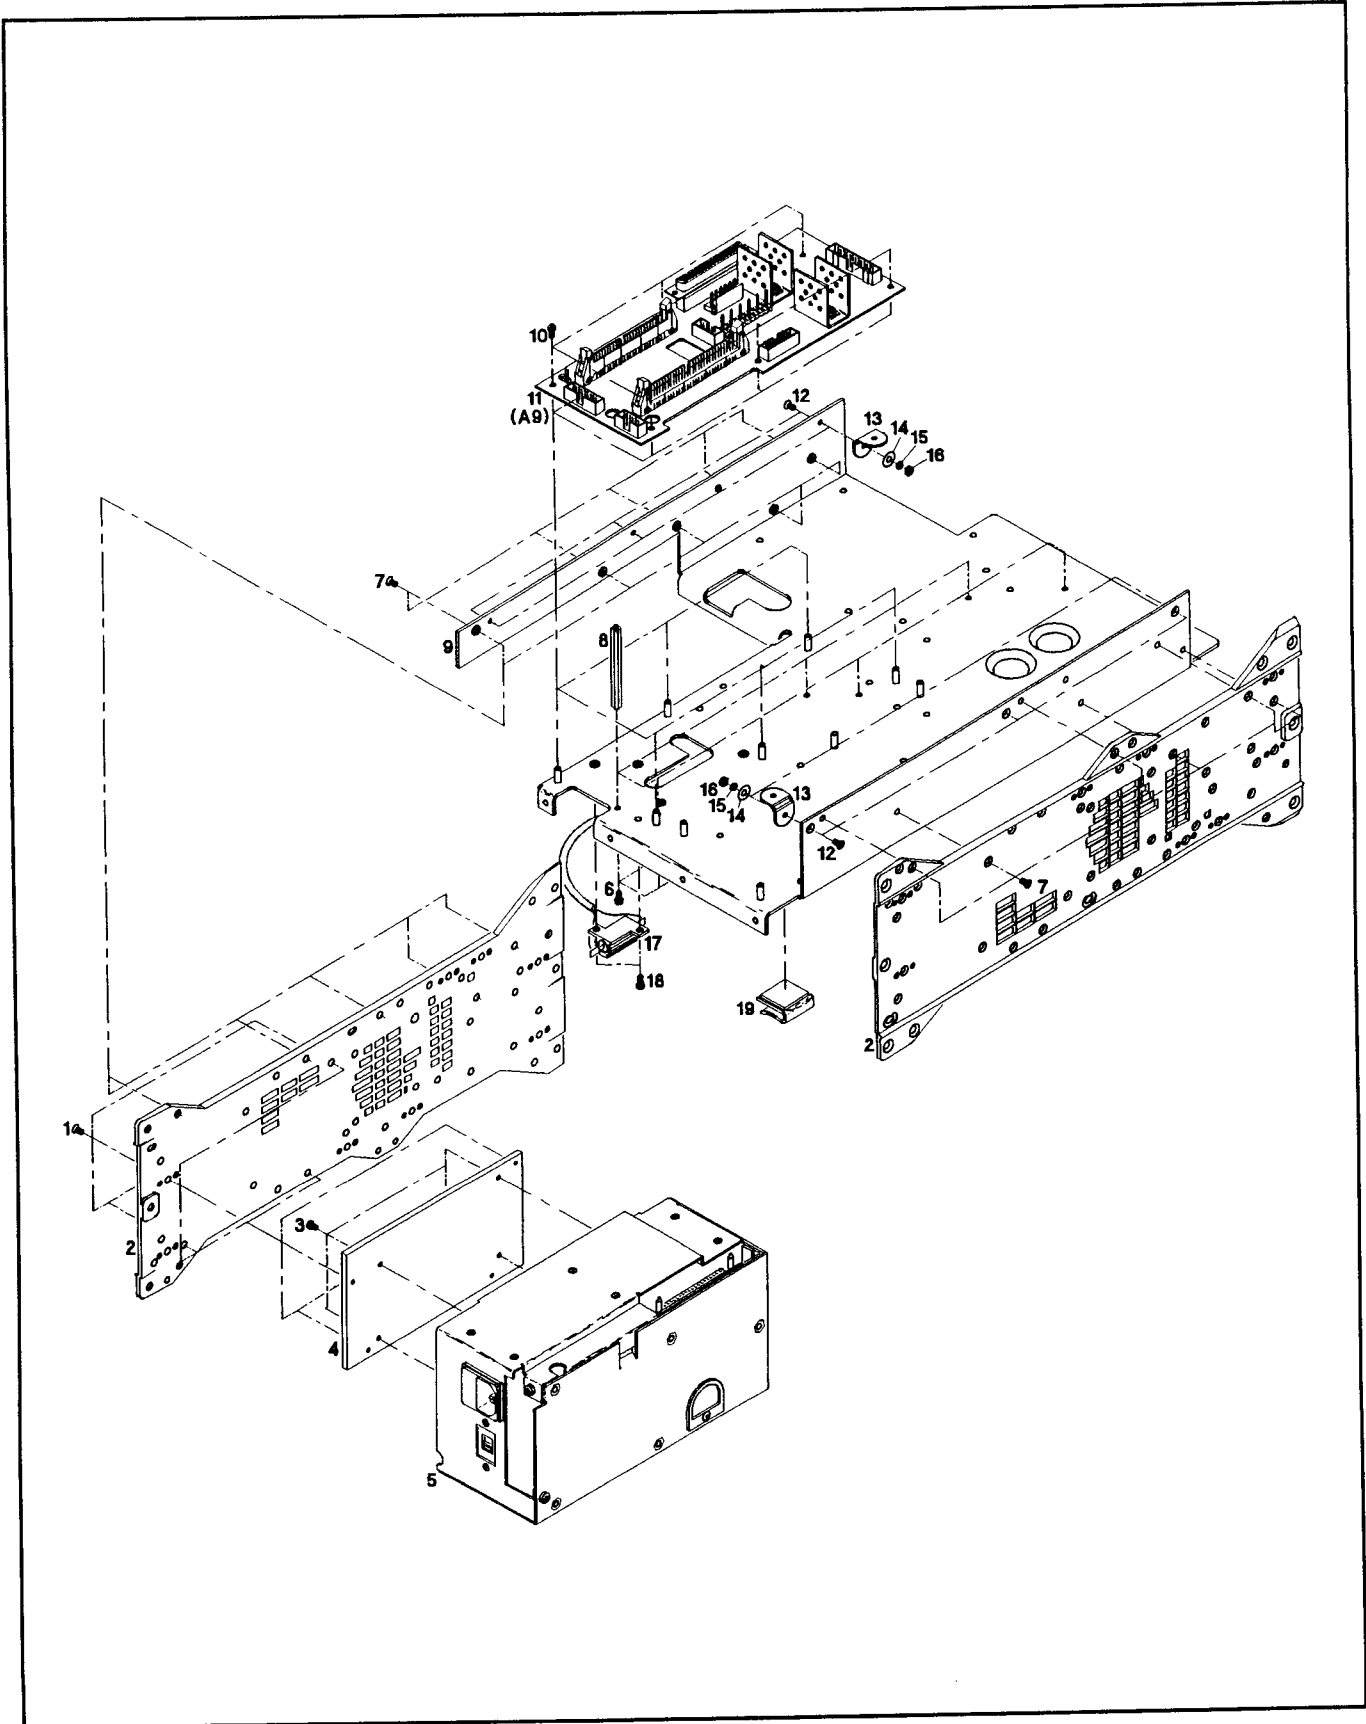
Chassis Parts Illustrated Parts Breakdown
